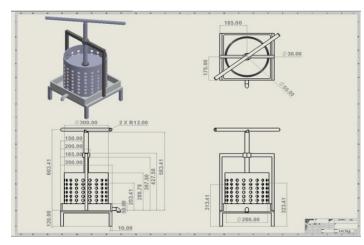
Shows the 3rd angle autographic projection with all detailed drawings and dimensions in mm.
